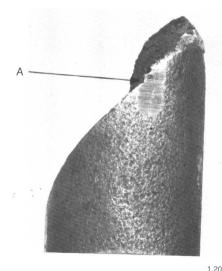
and 1.20. Rear axle side shaft with torsion fracture originating at grinding mark (A). 1×19 . Fig. 1.20. Surface at fracture origin
